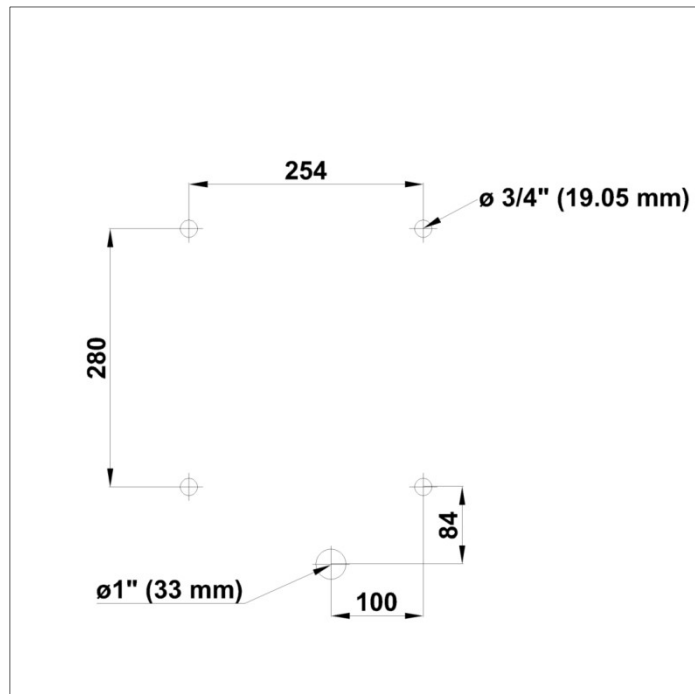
Dimensions mounting bolts siren speaker cluster base plate
